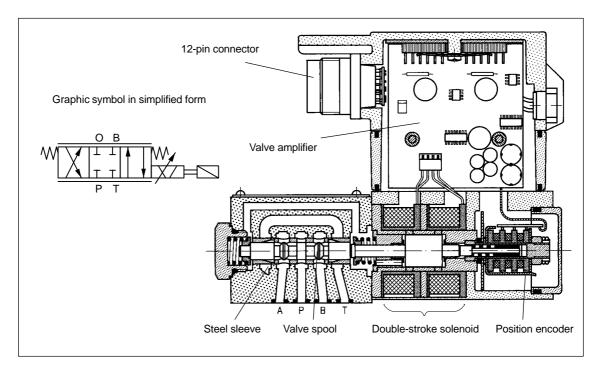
Directly-controlled HR servo solenoid valve (Rexroth)
